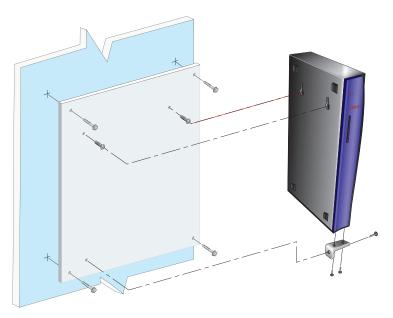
Wall Mounting the NetVanta 3430/NetVanta 3448
